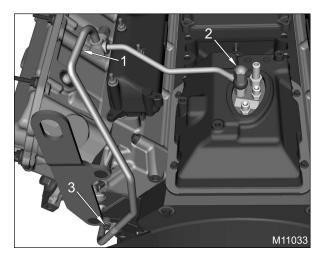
High-pressure pump to cooler tube assembly (upper connection)
